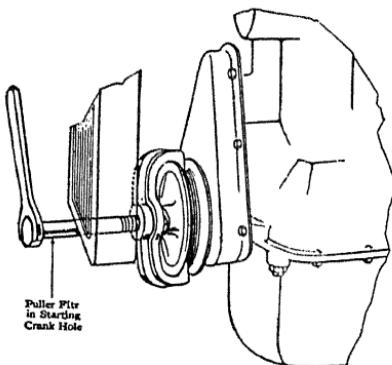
The Fan Drive Pulley May Be Removed by Means of a Puller
